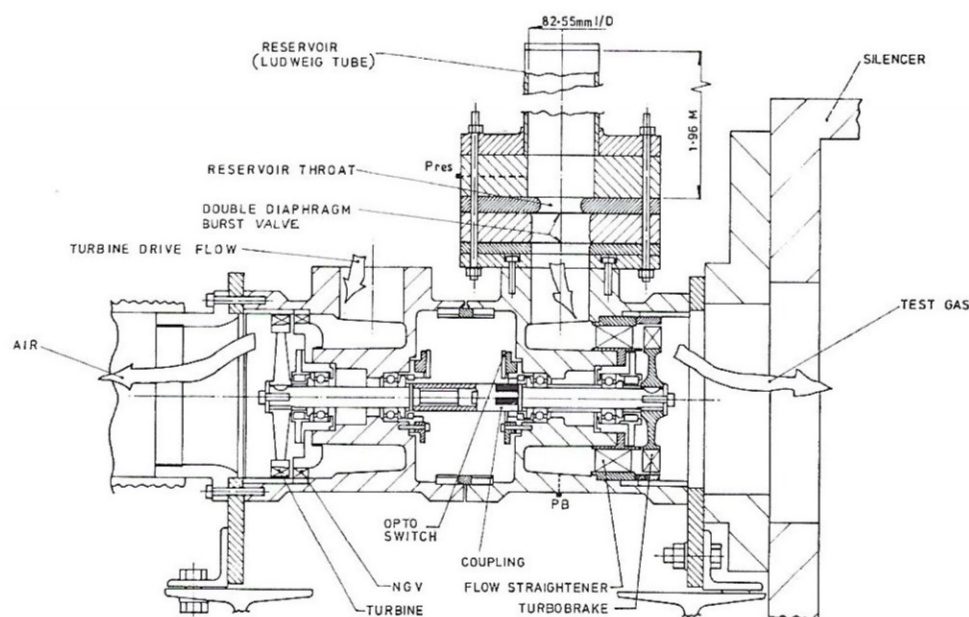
Model (0.17 scale) axial turbobrake test facility, constructed from two modified air motors mounted back to back
